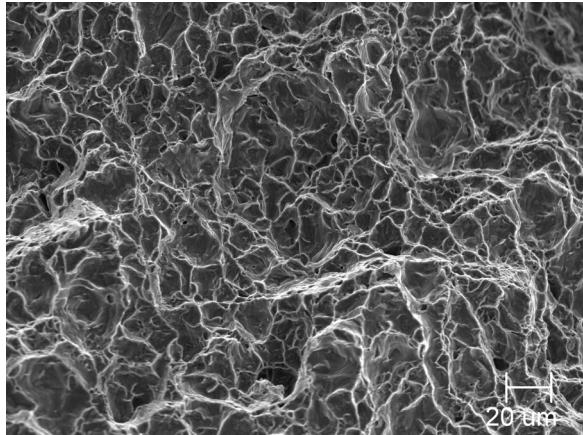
Room temperature tensile test fracture surfaces.
